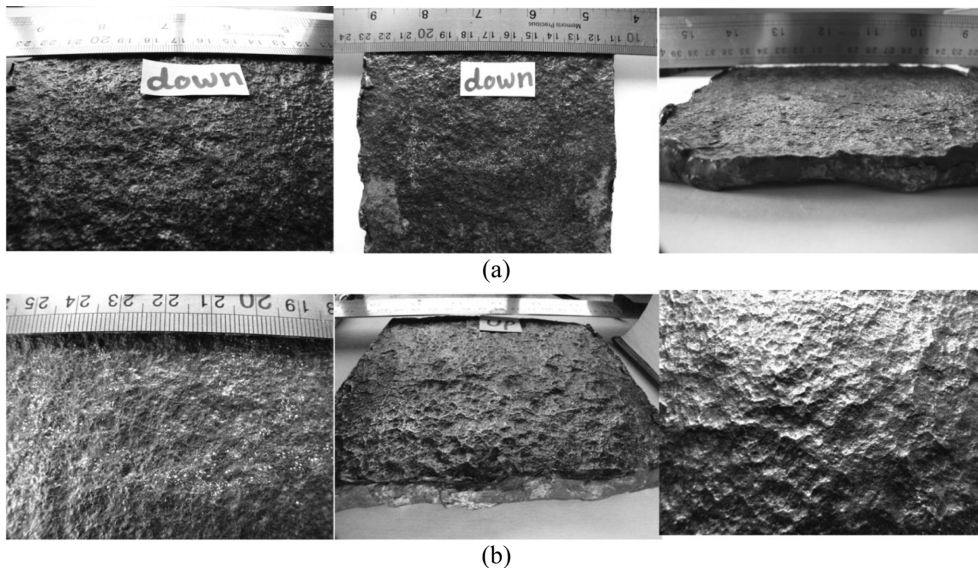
Views on the surfaces of the plate suffering general corrosion
